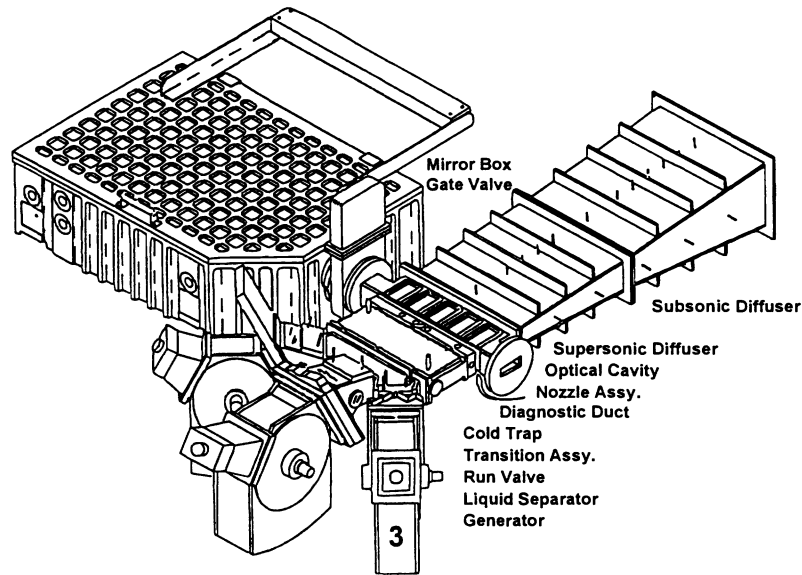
RotoCOIL Laser Device Isometric (Ref. 54)
